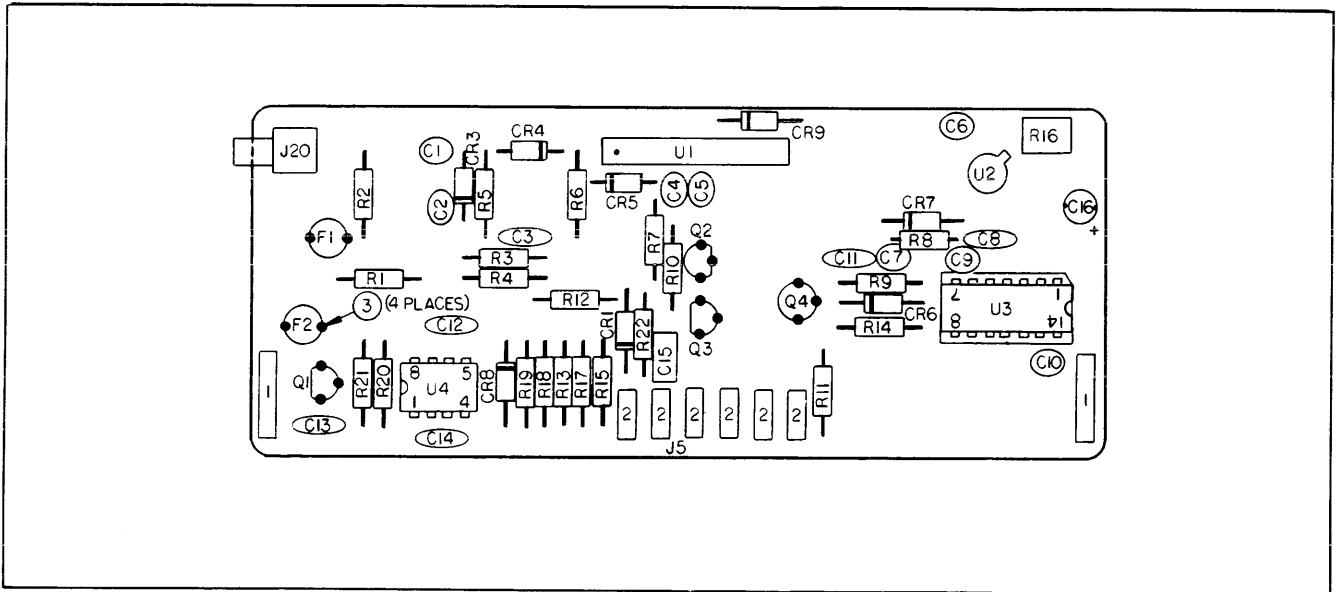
A9 520 MHz Prescaler PCB Assembly
